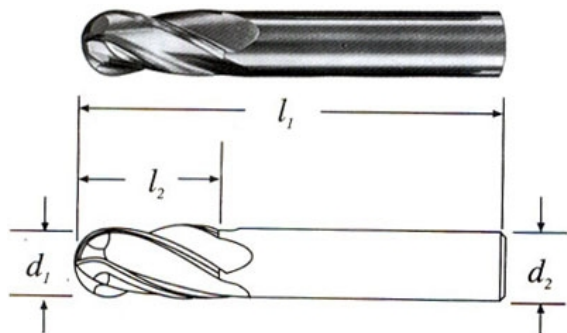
Ball-End Mill tool for Ball-End-Slot-End-Milling Process (from [18])
